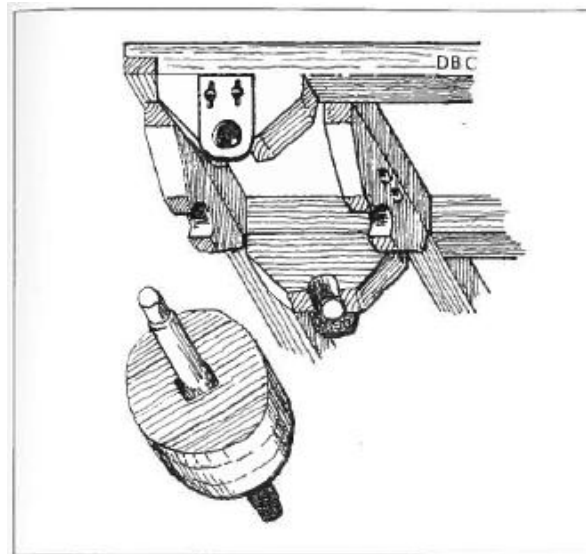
shows a general wheel assembly for siege engines.<sup>xviii</sup>
